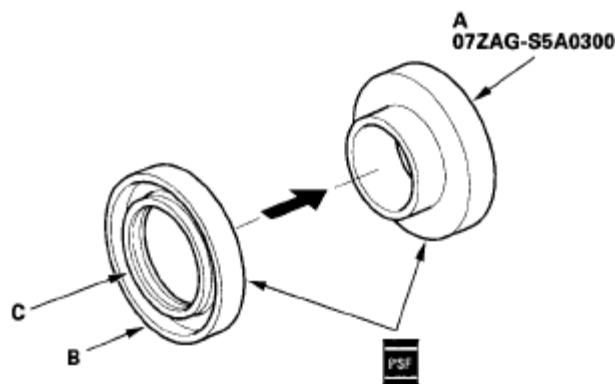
Identifying Seal On Seal Slider With Grooved Side
